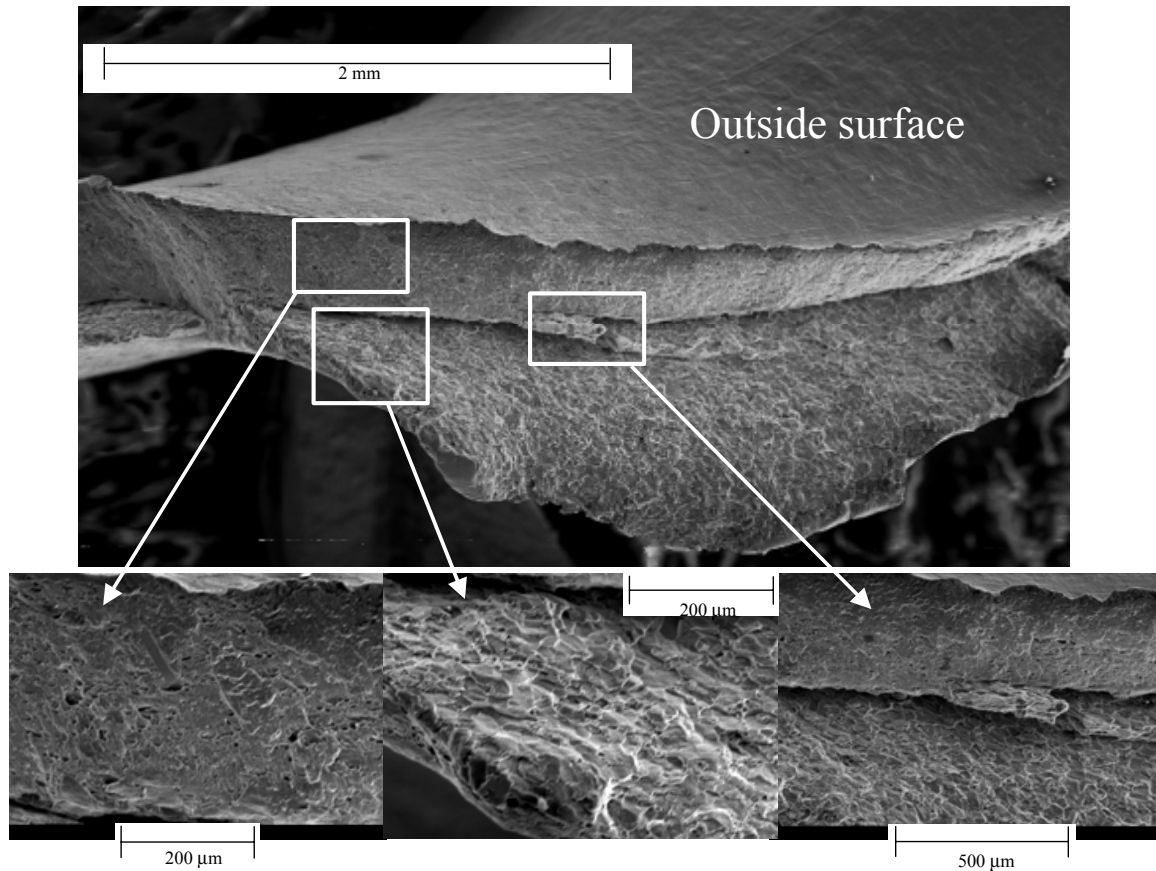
Fracture surface of a free-formed AA6111 sample.
